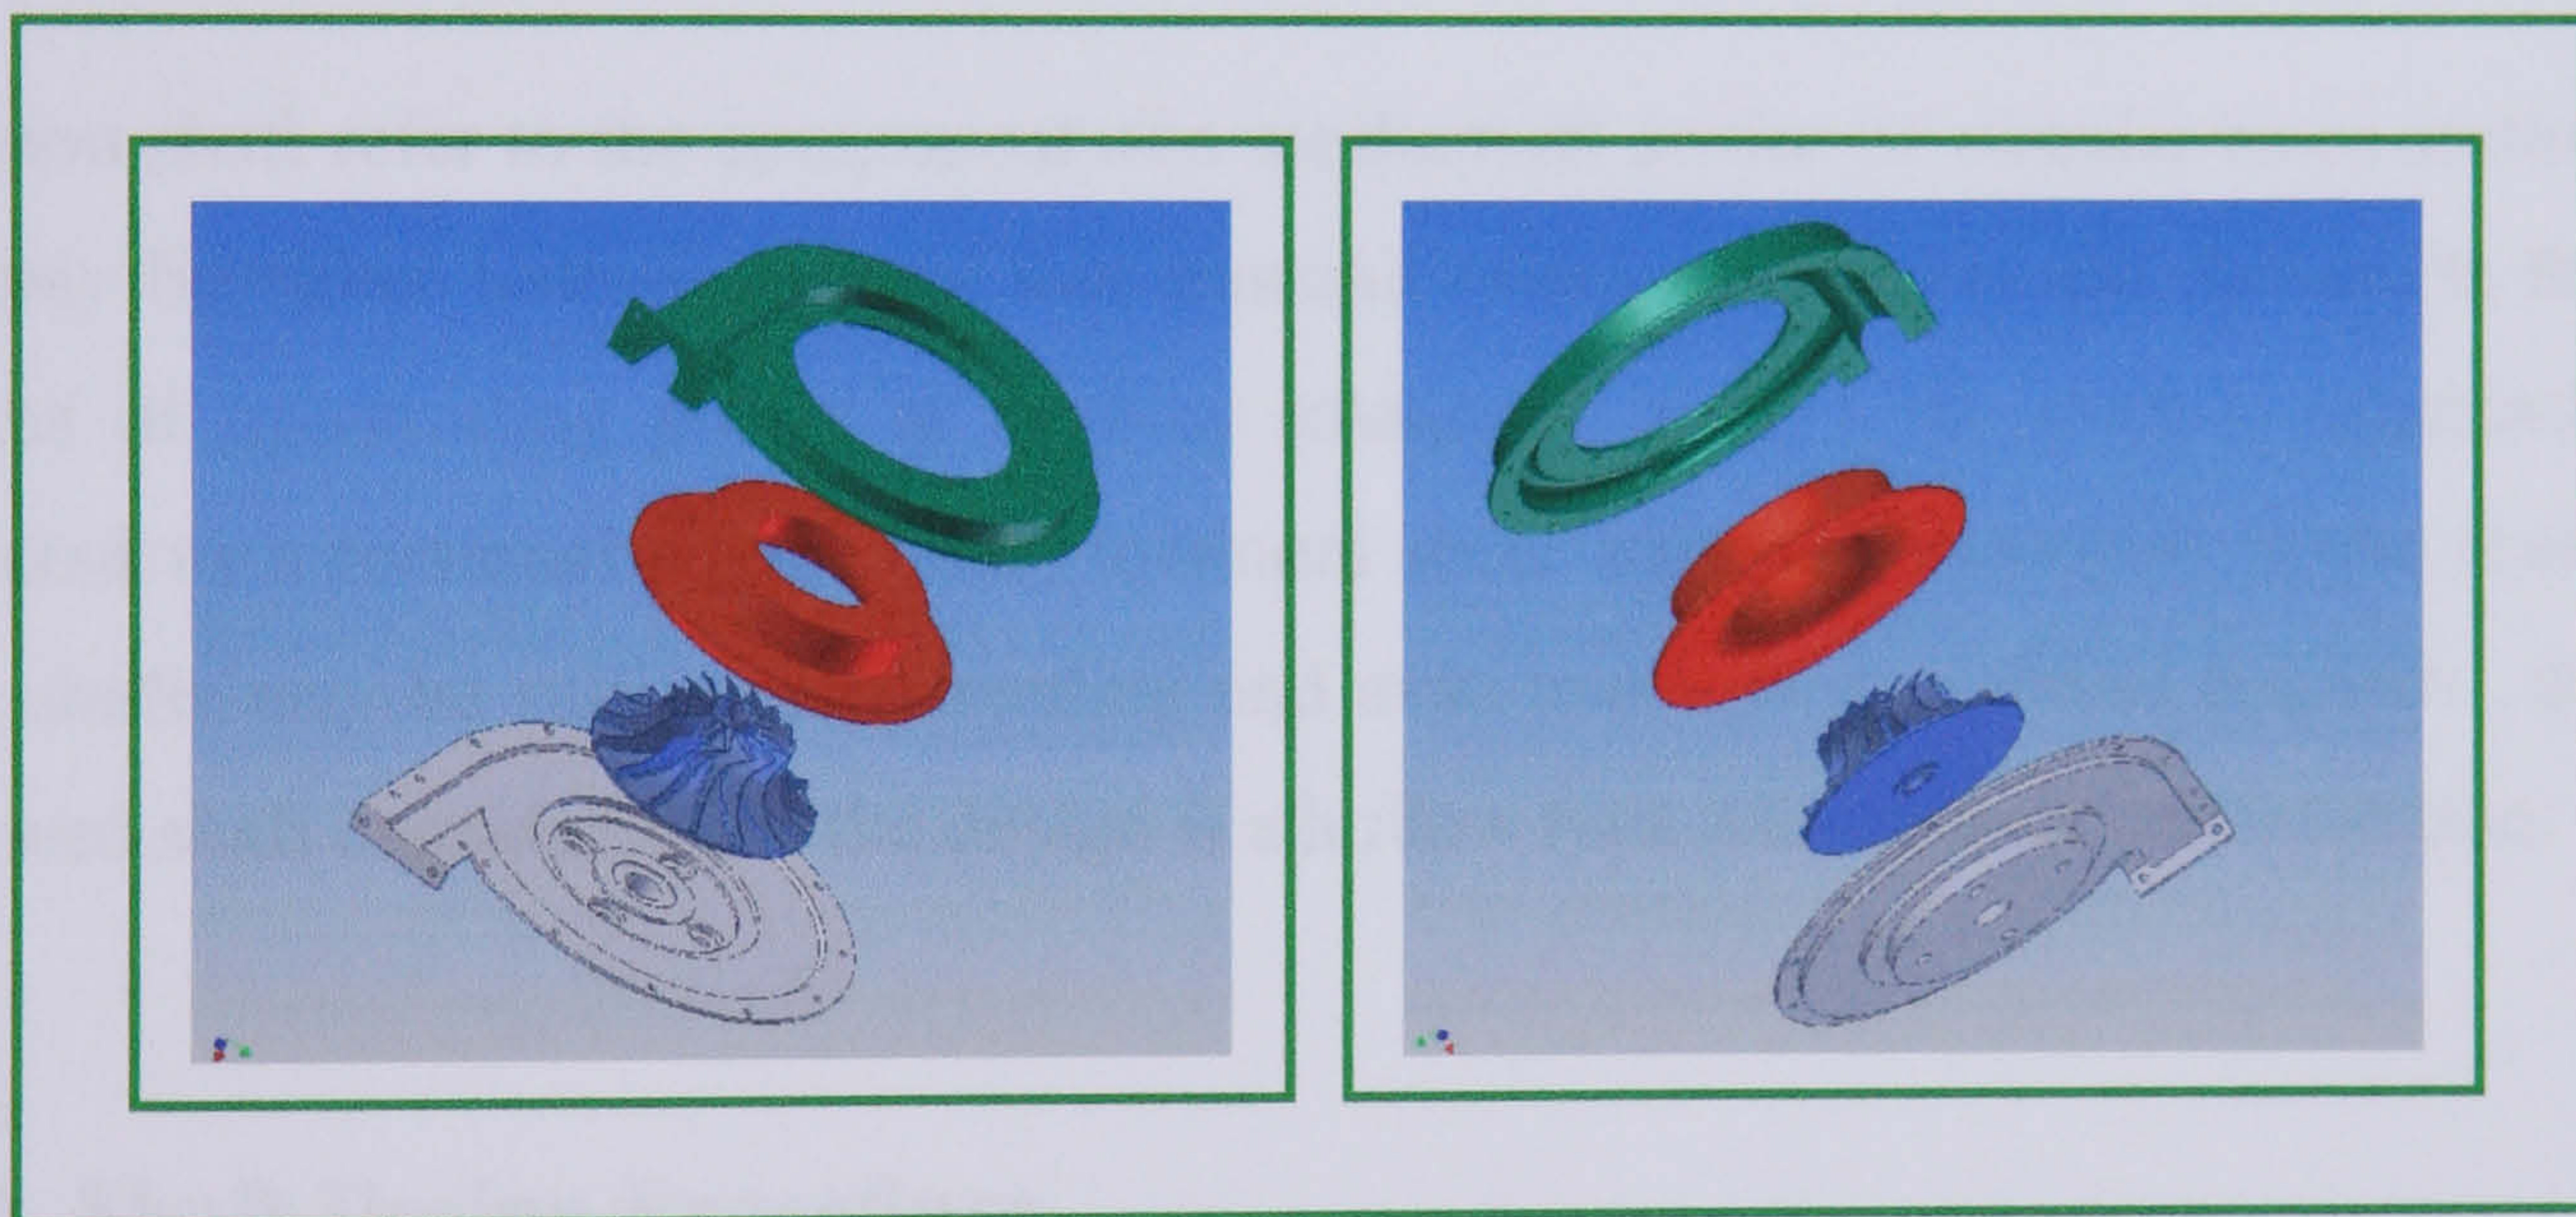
EXPLODED VIEW OF THE SOLID MODEL OF THE CENTRIFUGAL COMPRESSOR ASSEMBLY
